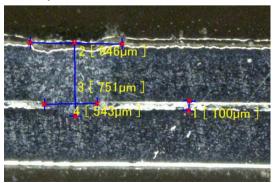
Picture of weld with spacer sheets, with 1 mm defocus
